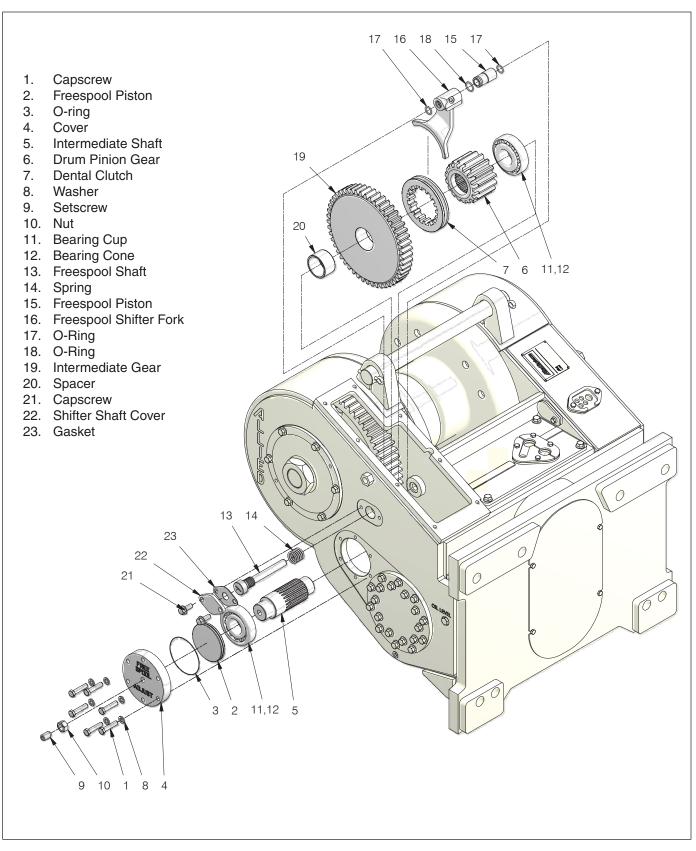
Location of Intermediate and Freespool Shaft Components
